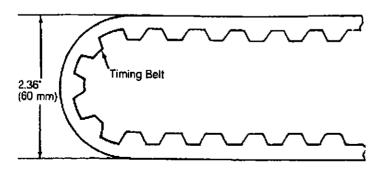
Measuring Timing Belt Bend Radius Courtesy of Subaru of America, Inc.
